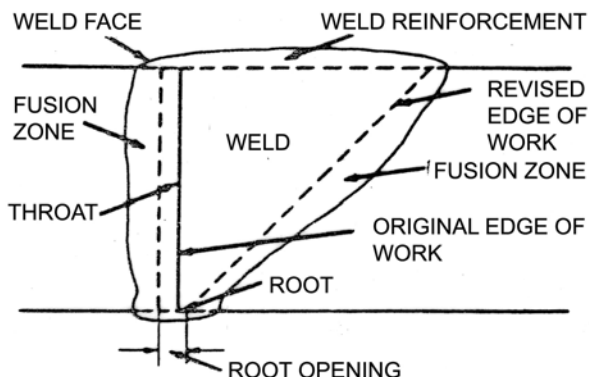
Parts of a Single Bevel Butt weld
